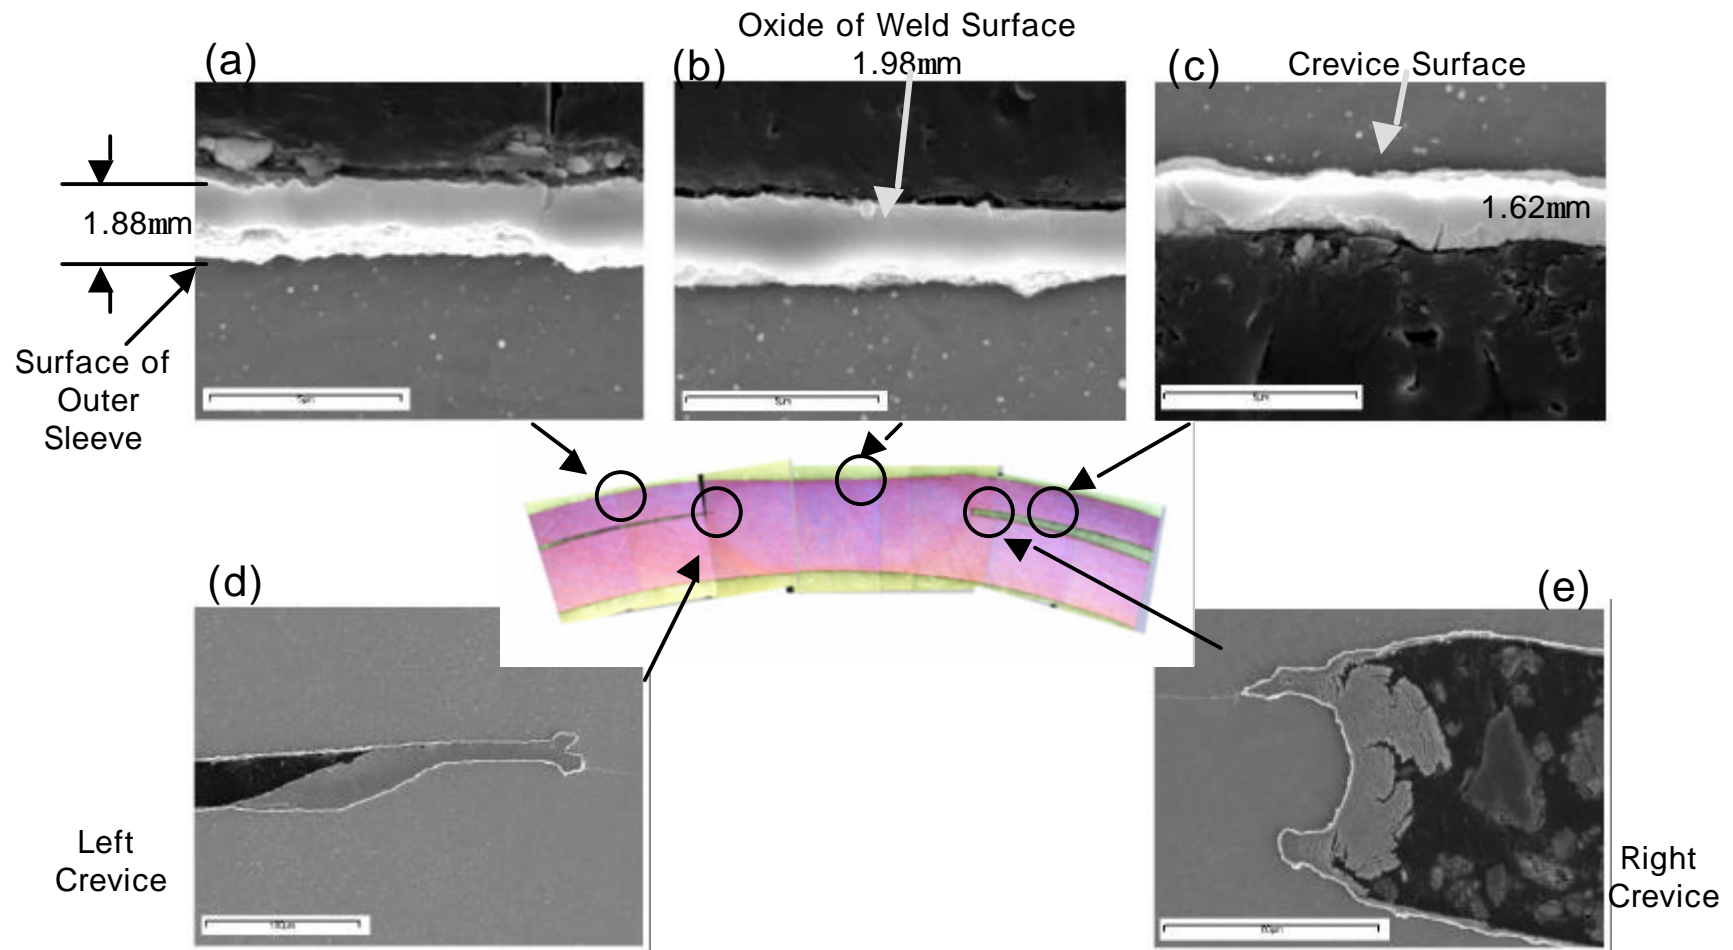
Oxide morphologies of the ZIRLO guide thimble and thin sleeve spot welding specimen
